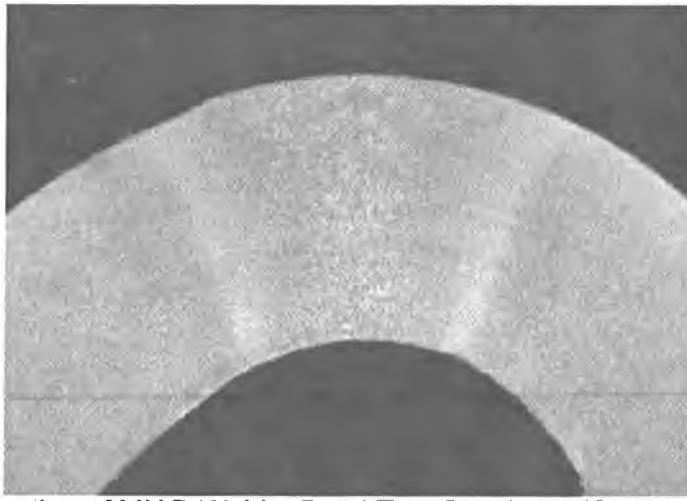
Macro Section of MIAB Weld – Bend Test Specimen (Courtesy of MIAB Technology Pty)
